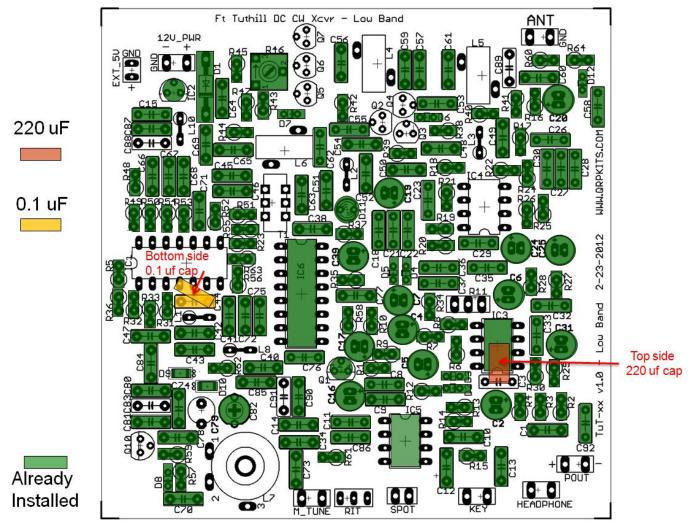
Installation of bottom side 0.1 uf and top side C3/C44components
